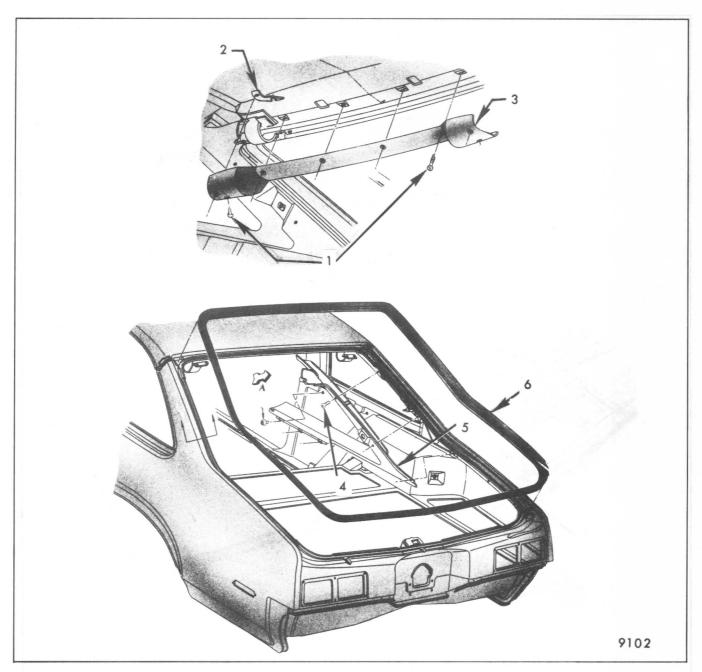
Rear Compartment Trim and Weatherstrip Removal
